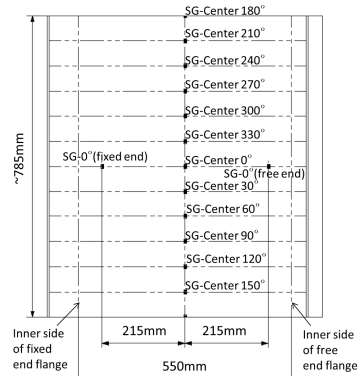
UNFOLDED VIEW OF TEST DRUM B WITH STRAIN GAUGE LOCATIONS
